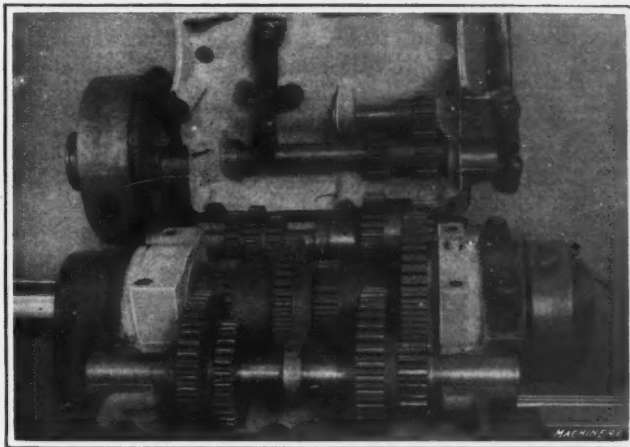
View of Geared Head with Cover removed showing Gears in Place
